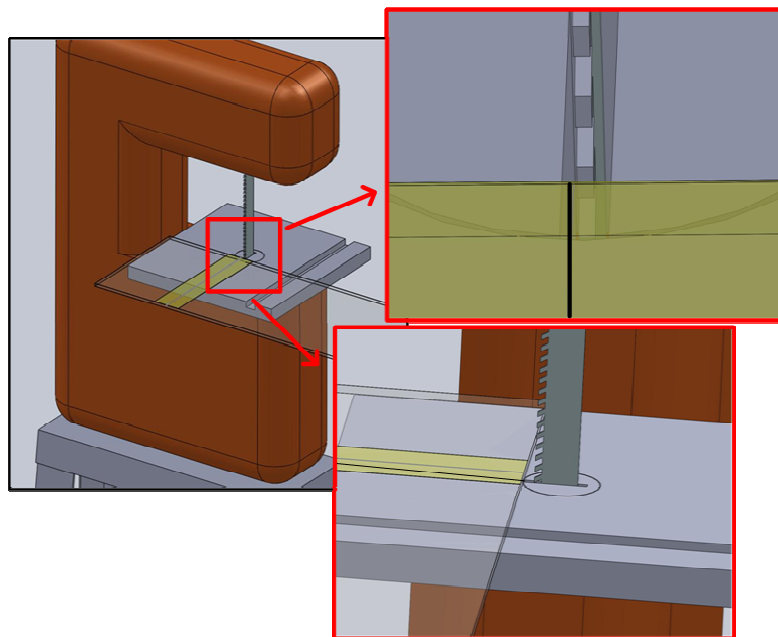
The line to be cut should be off-set from the blade to ensure that the resulting work piece will be the desired dimension.
